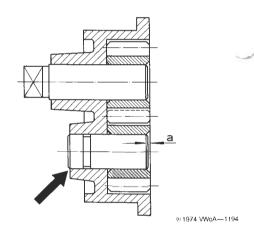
Shaft for driven gear (arrow). Dimension a must be 0.50 to 1.00 mm (.020 to .040 in.).
